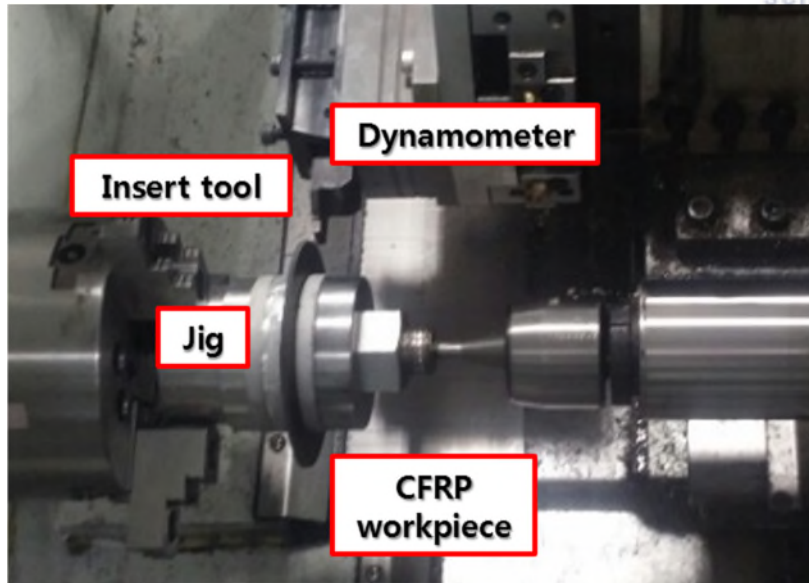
Experimental setup of the orthogonal machining for CFRP material
